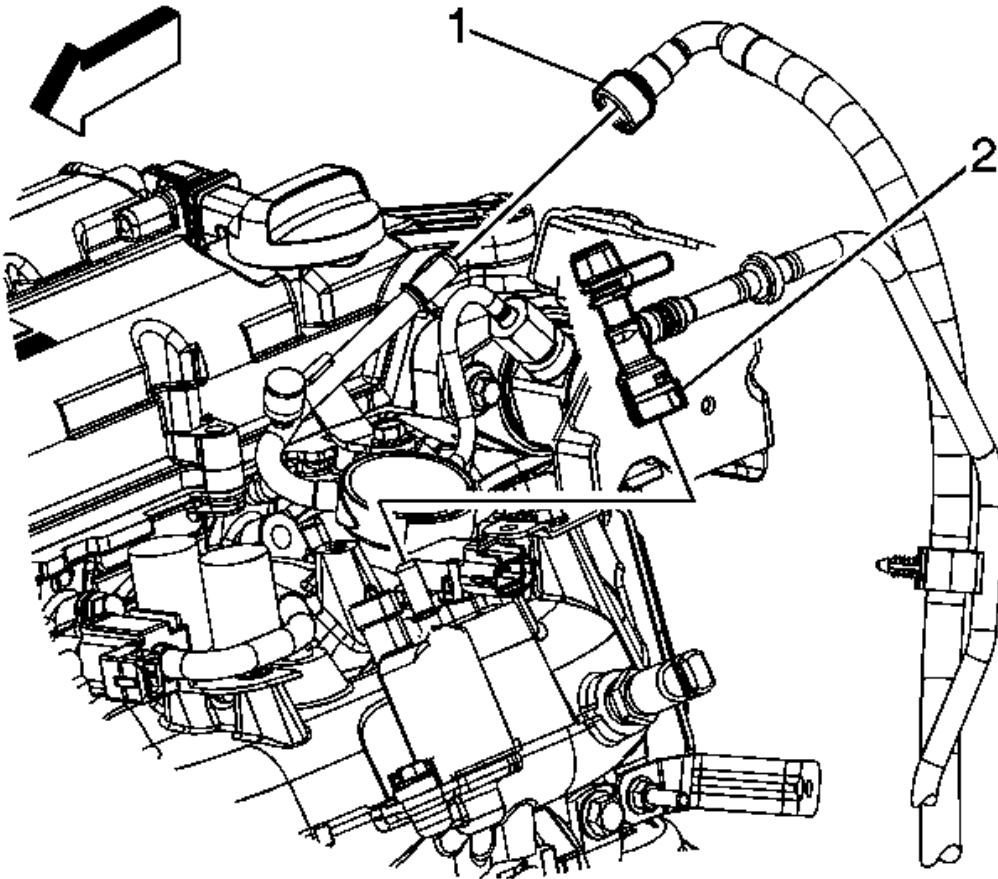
Identifying EVAP & Fuel Feed Pipes
